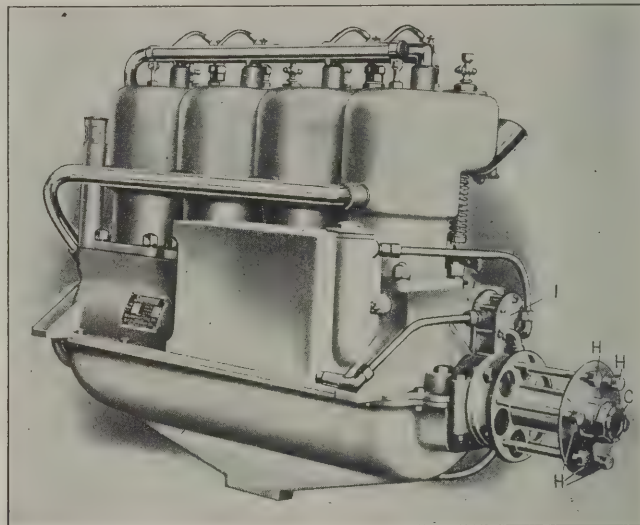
Rear View of Four-cylinder Motor showing Method of Attaching Propeller
